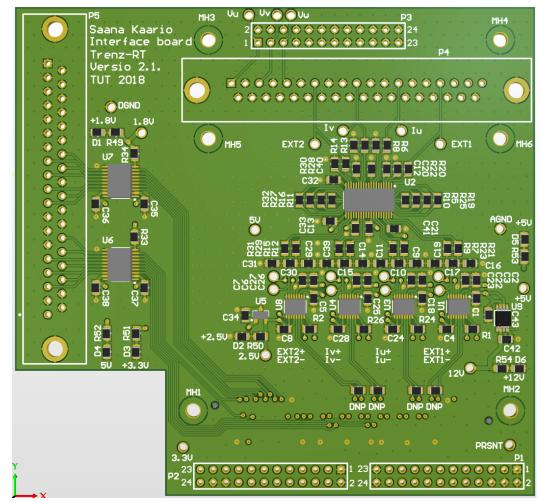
3D-model of the final PCB design with most components on their place presented in 2D
